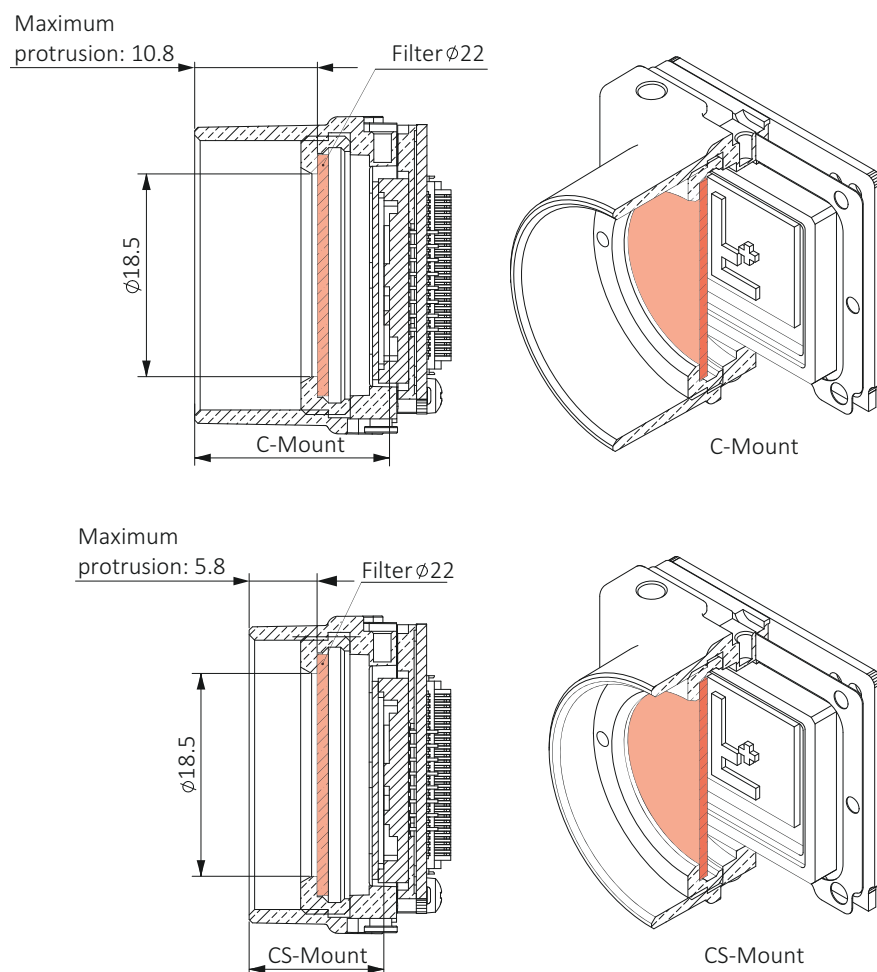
C-Mount and CS-Mount dimensions for Mako G models
